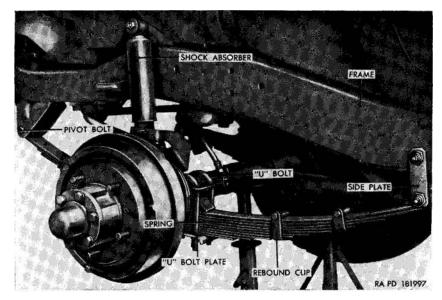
(Added) Front spring and shock absorber M170—installed.
